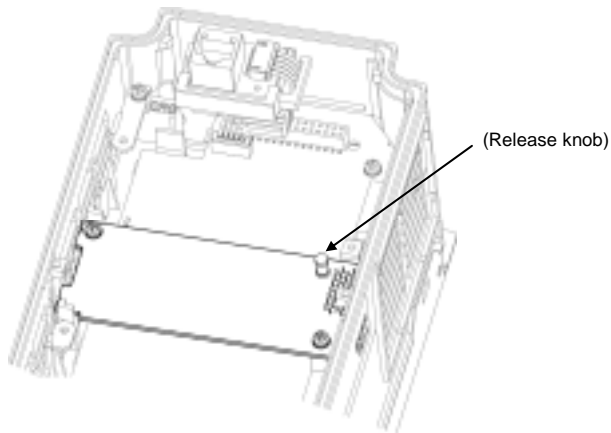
Mounting Completed (to FRENIC-MEGA B-port)
